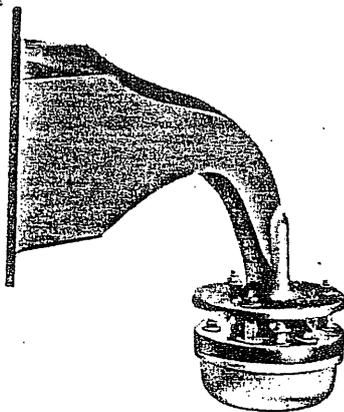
720A Receiver adapted to replace 707F Receiver, using D-173471 Conversion Parts.
